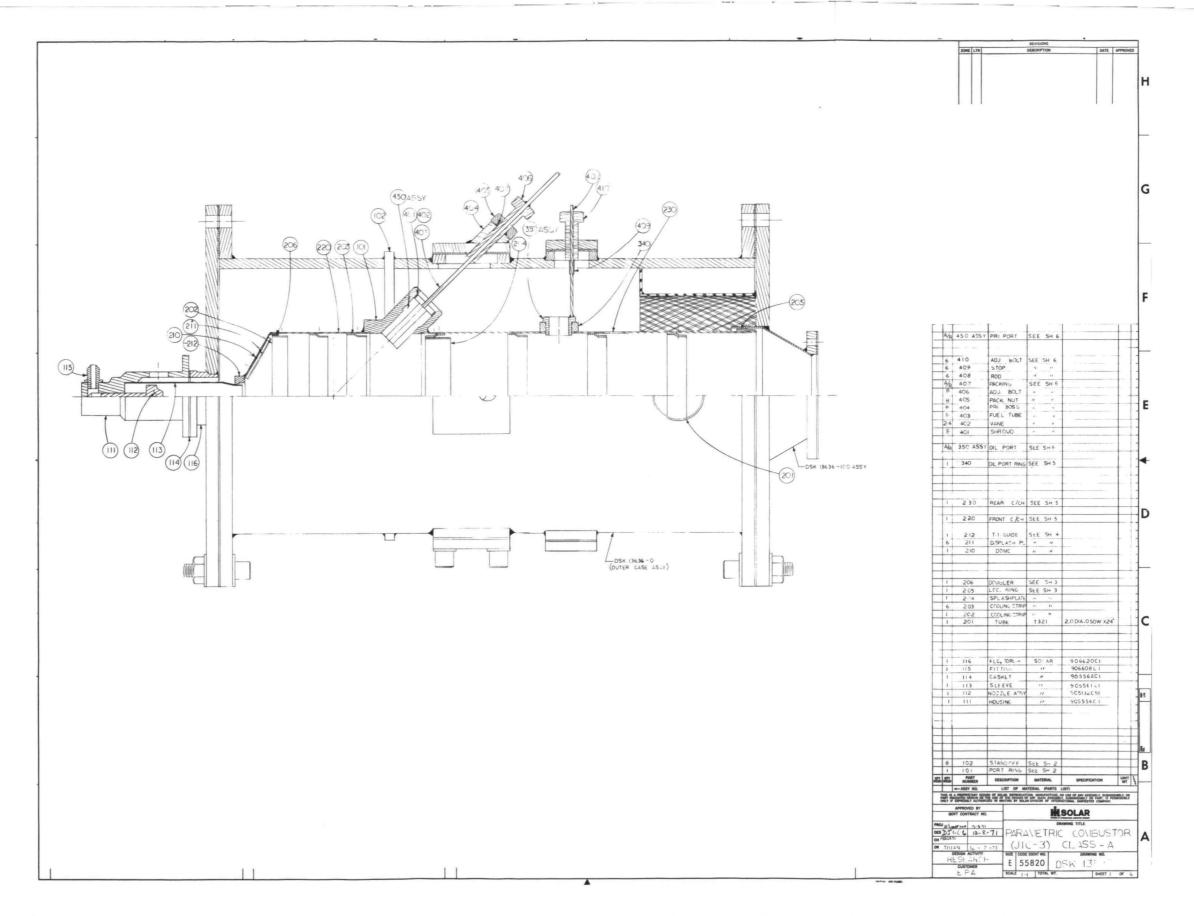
ASSEMBLY DRAWING OF PARAMETRIC COMBUSTOR CLASS A
